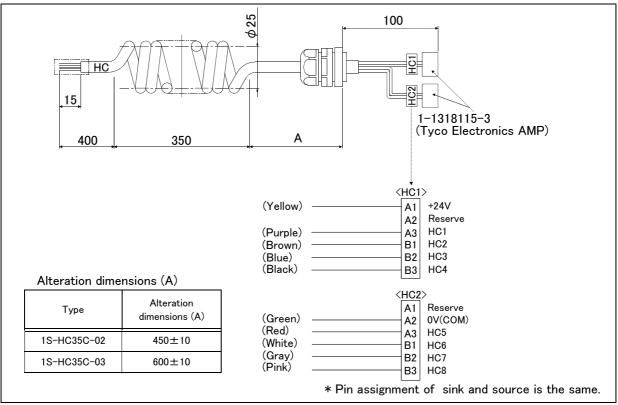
Outside dimensional drawing and pin assignment (RH-6SQH/12SQH/18SQH/20SQH series)
